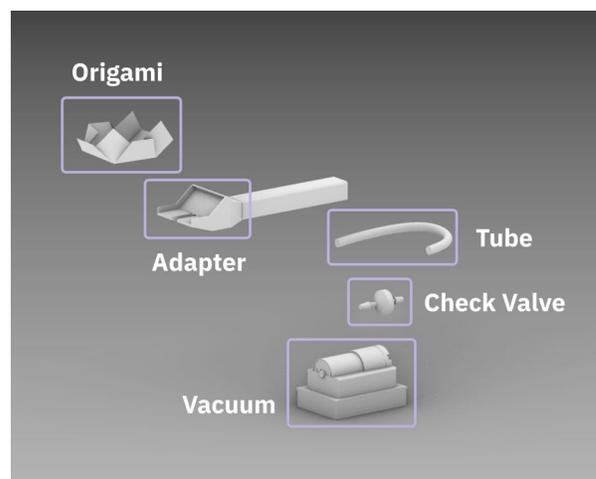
The SODA acquisition system comprises 5 components: A 3D printed origami structure with membrane; An adapter to fix the tube and origami; An extension tube; A check valve to maintain pressure in the membrane; and A vacuum motor as the actuator.
